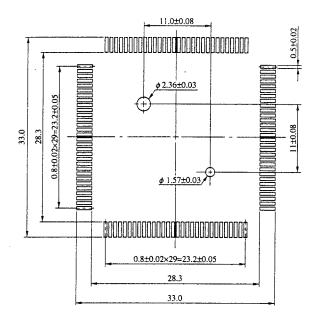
Drawings of the Conversion Socket (EV-9200GD-120) (Reference)
